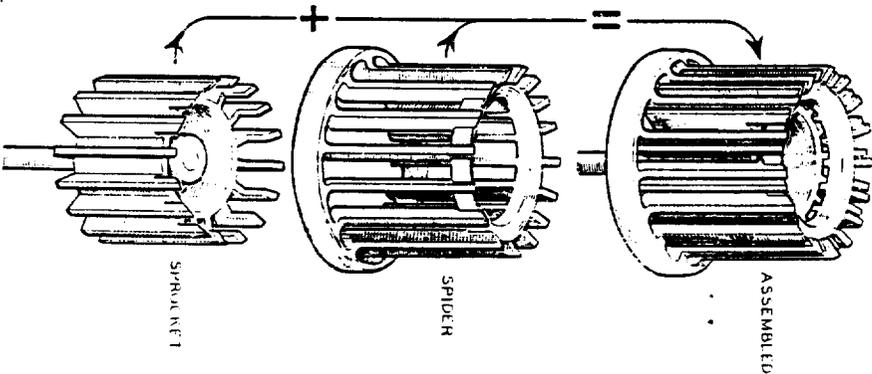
Diagram showing how the sprocket fits into the spider on an eccentric axis to form the complete thread advancing reel.
